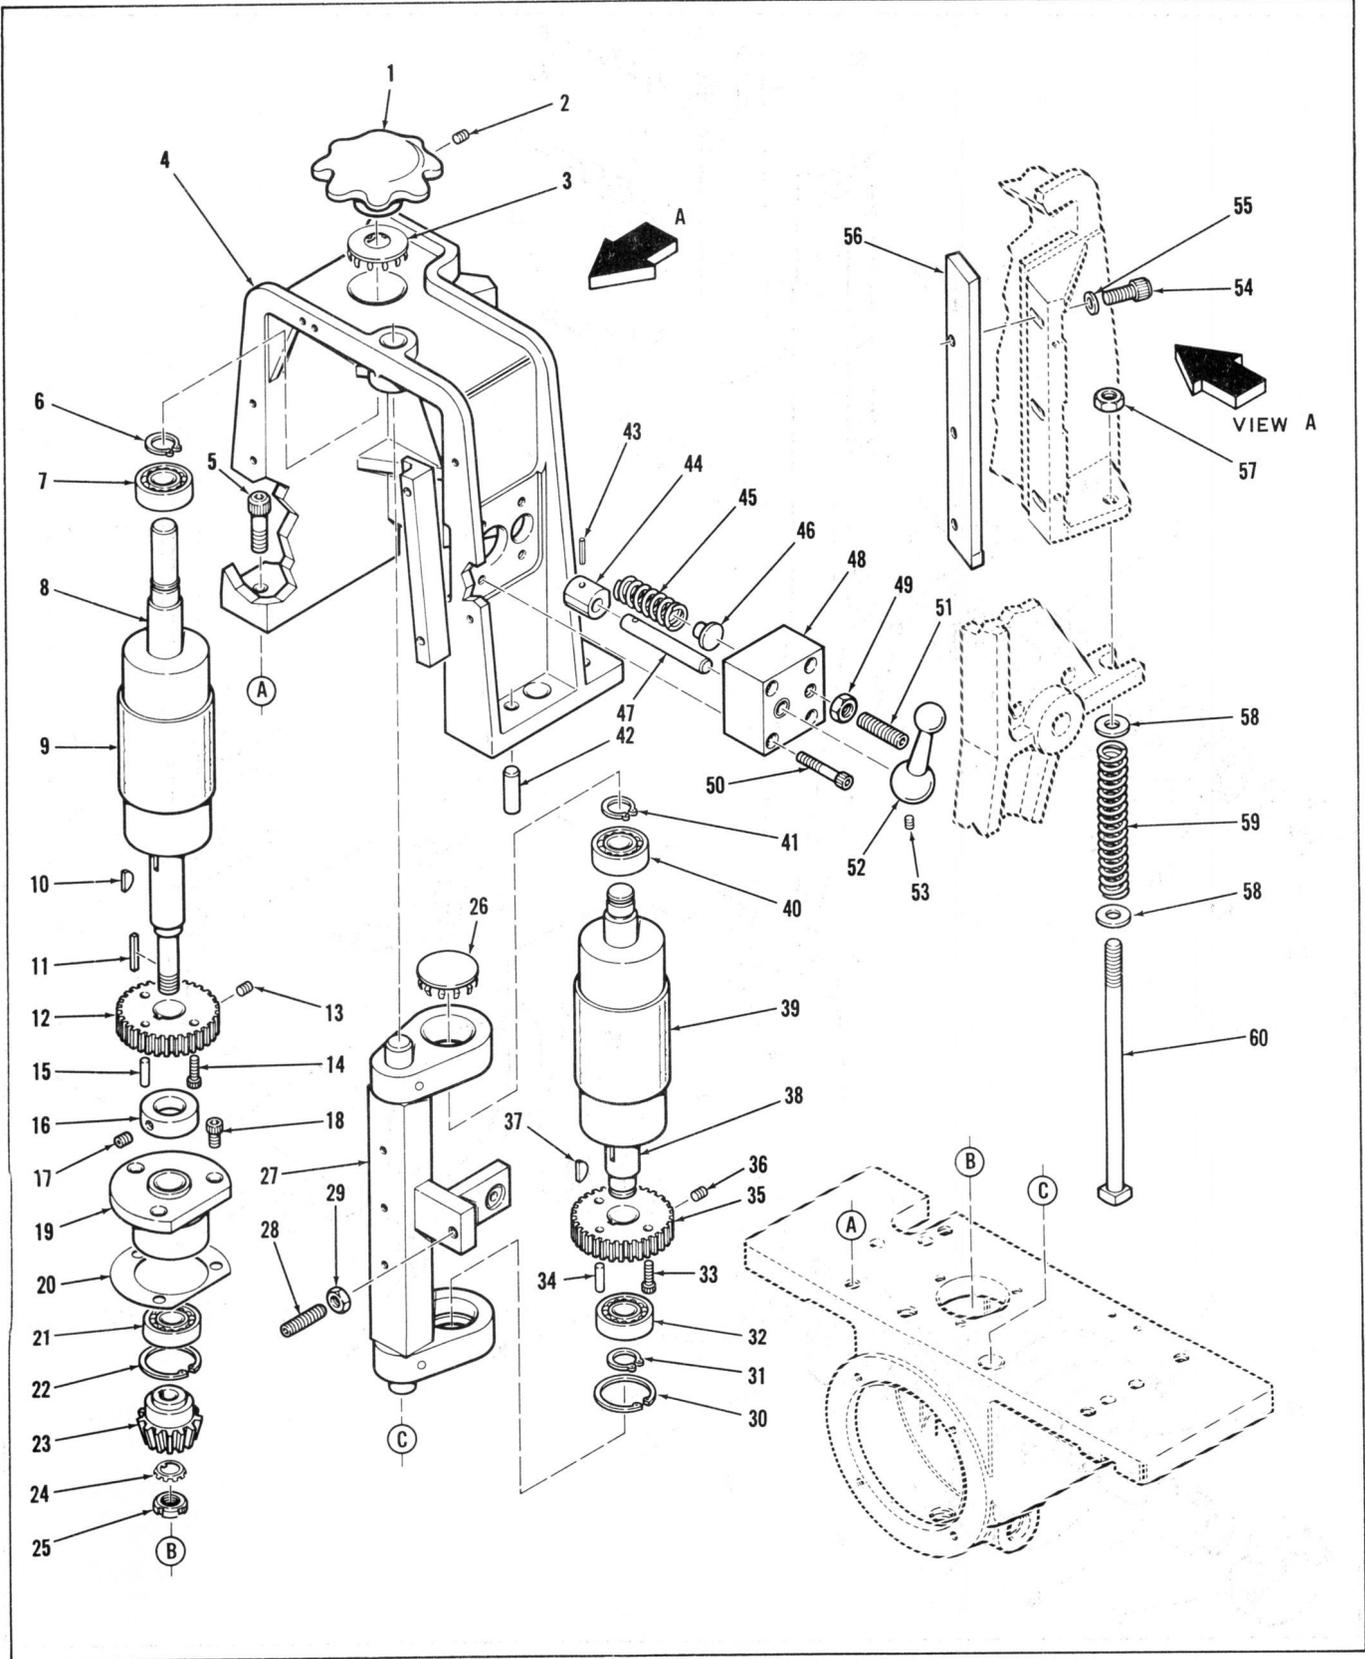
Disassembly of Feed Roll and Cutoff Assembly (Sheet 1 of 2)
